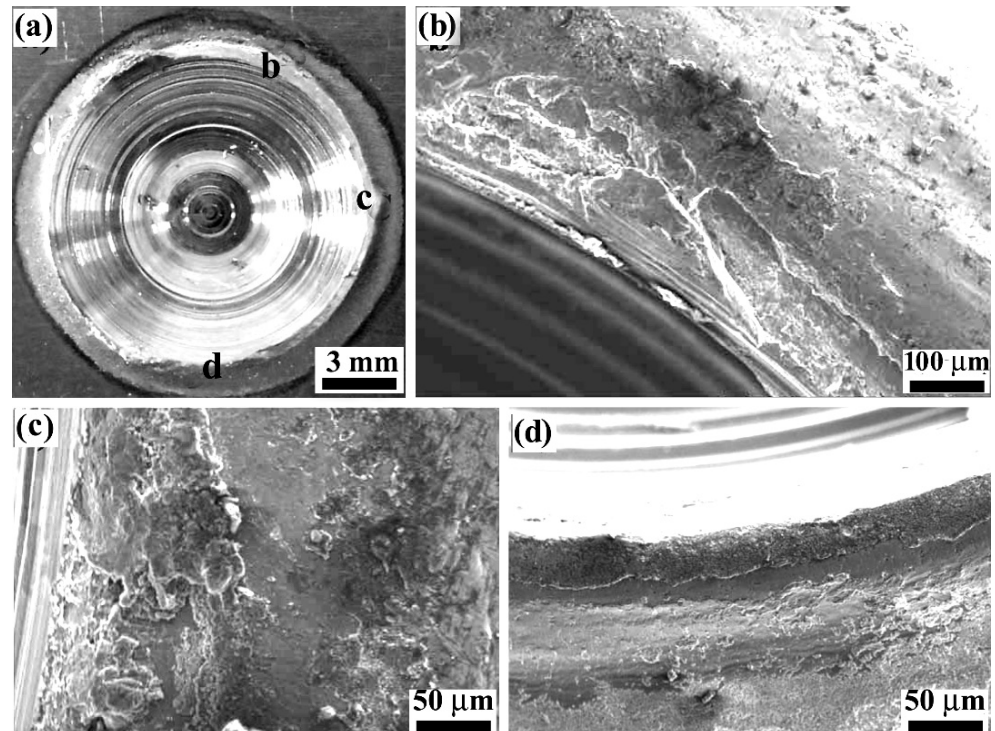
Macroscopic appearance of the failure modes (Dissimilar AZ31B/AA6061-T6 sheets).
